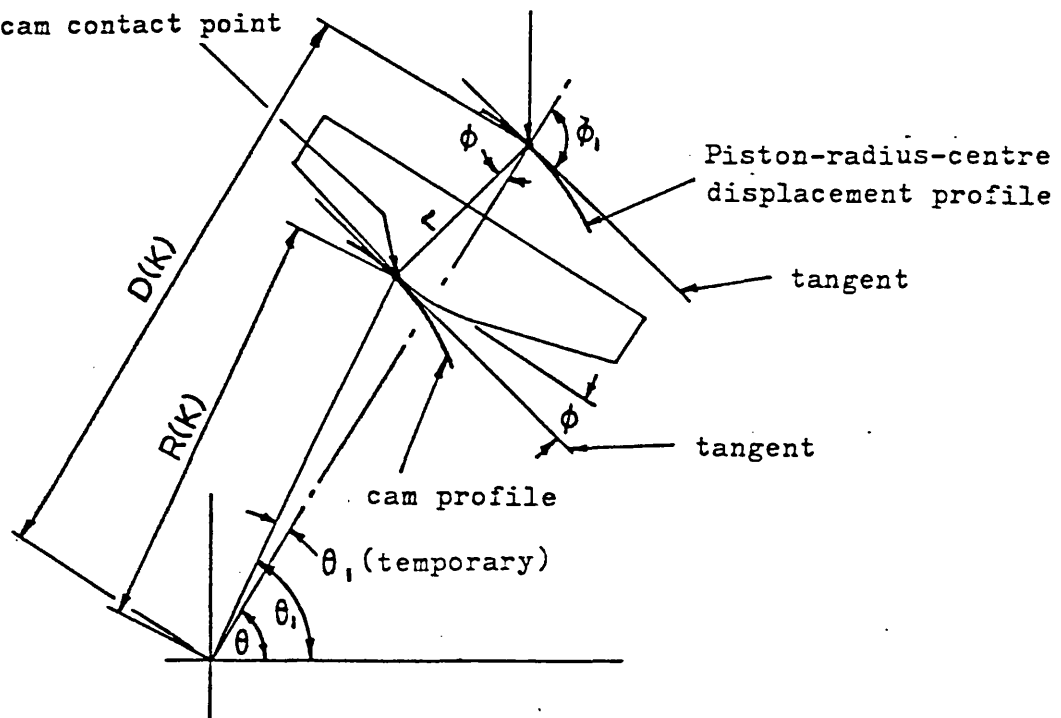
DIAGRAMS SHOWING CAM AND PISTON-FOLLOWER GEOMETRY
